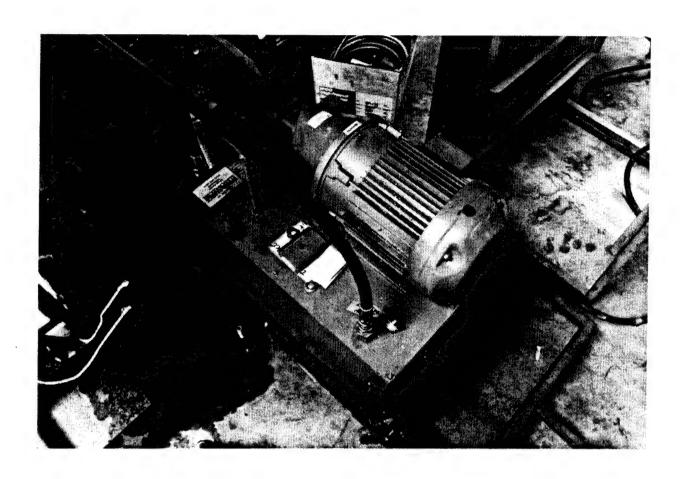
Hydraulic Power Unit Used to Power the TACOM Pin Insertion Assembly Apparatus
